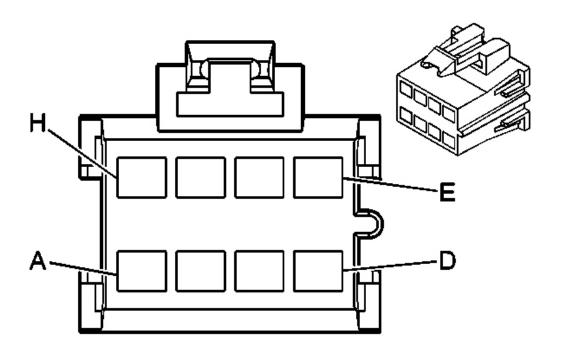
Seat Adjuster Switch - Passenger (AG2) Connector End Views Courtesy of GENERAL MOTORS CORP.
